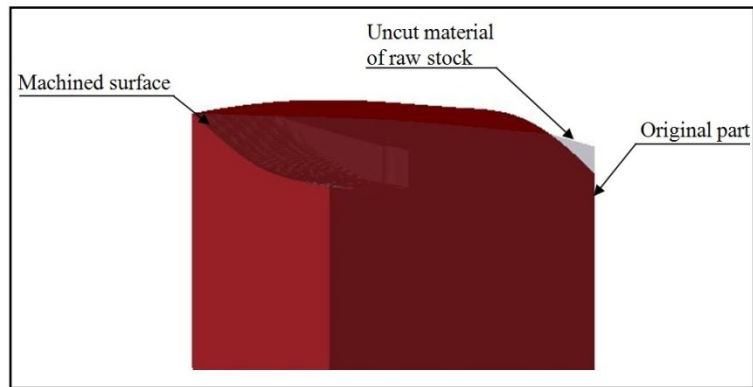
Visual verification of part 2 using 3-axis machining simulation.
